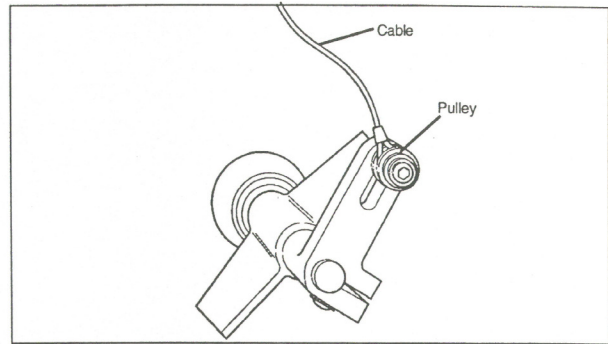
Lower quill and loop cable over pulley on lower crank handle assembly.
